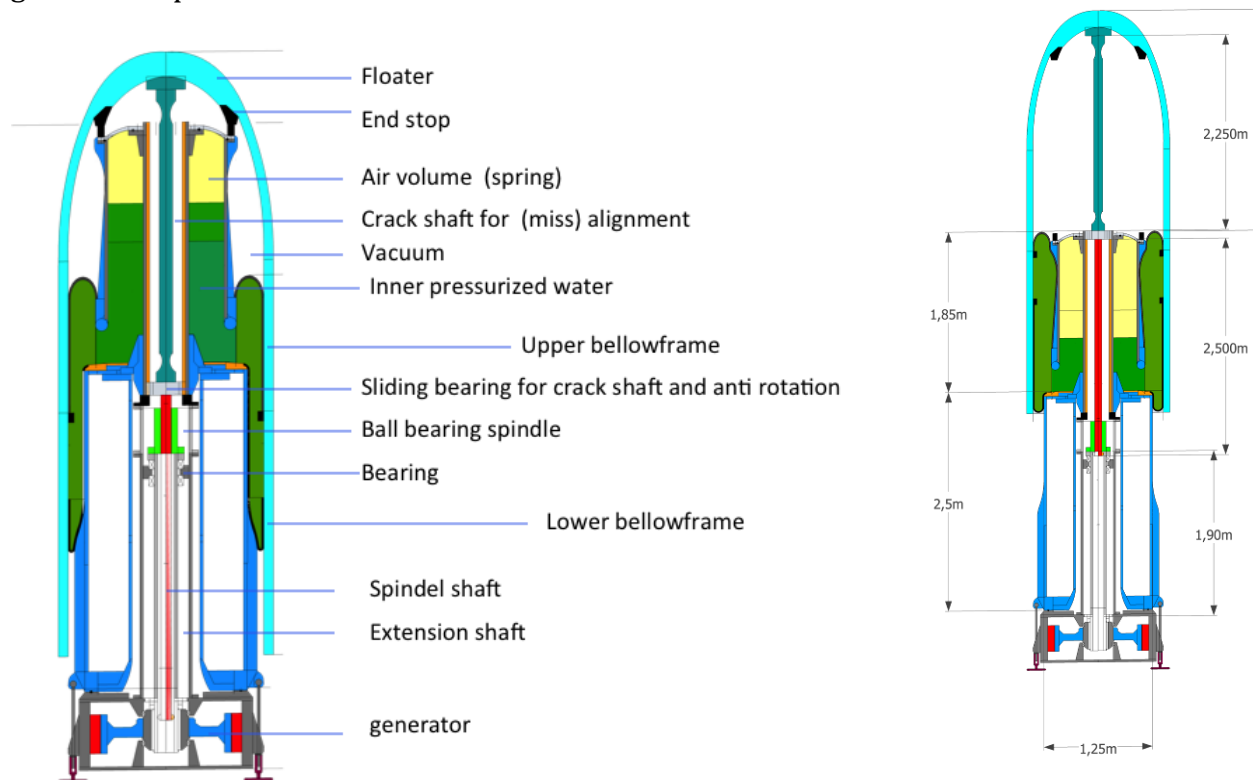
Initial conceptual design for integrating a linear spindle drive into the Symphony 1.5m diameter prototype.
